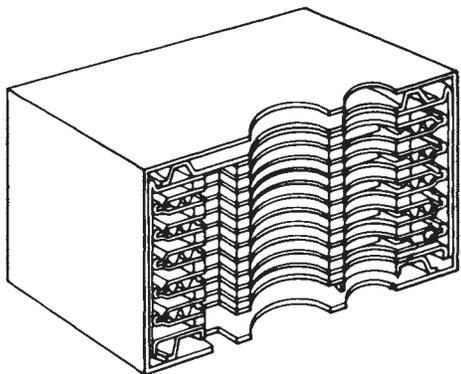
Cutaway view of a typical plate-type heat exchanger
